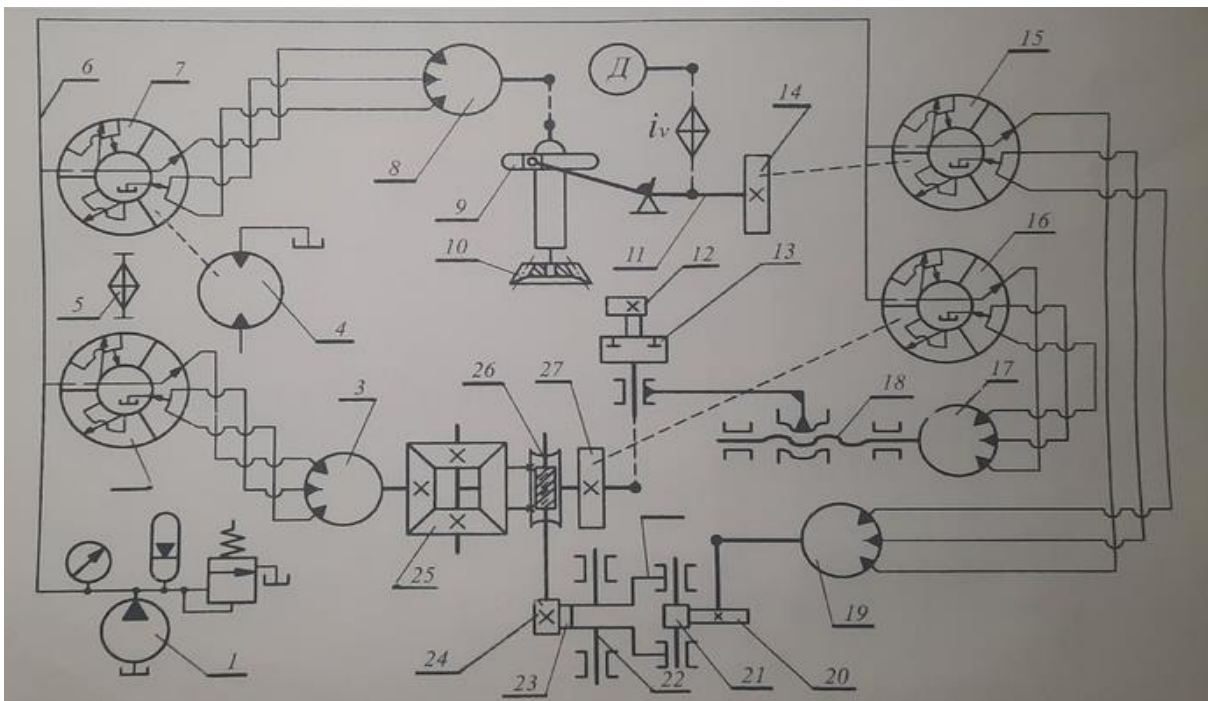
Structural diagram of a hydraulically coupled gear shaping machine
